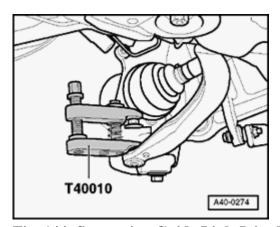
Separating Guide Link Joint Pin From Tapered Seat Using Ball Joint Puller T40010
